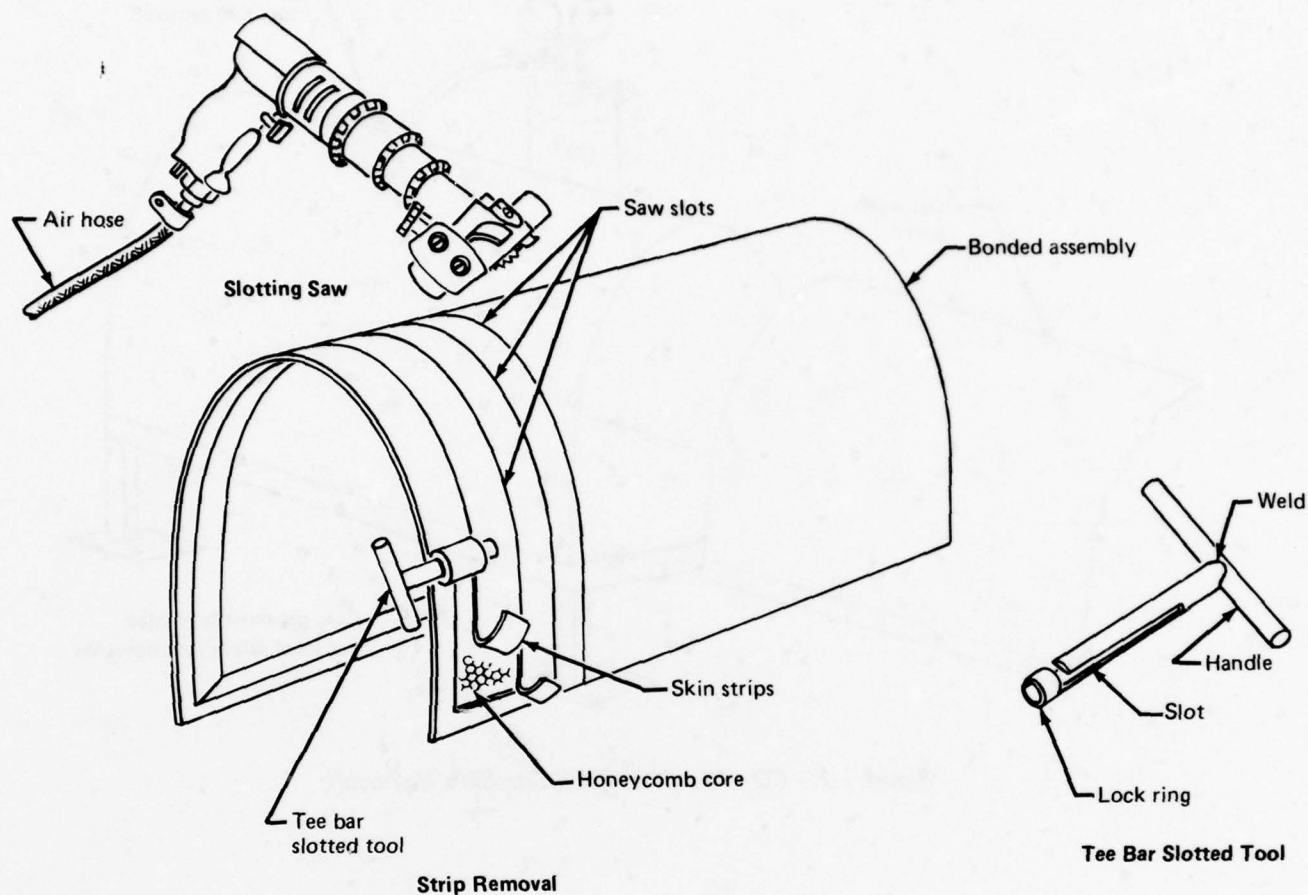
Honeycomb Panel Skin Cut in Strips to Facilitate Removal
